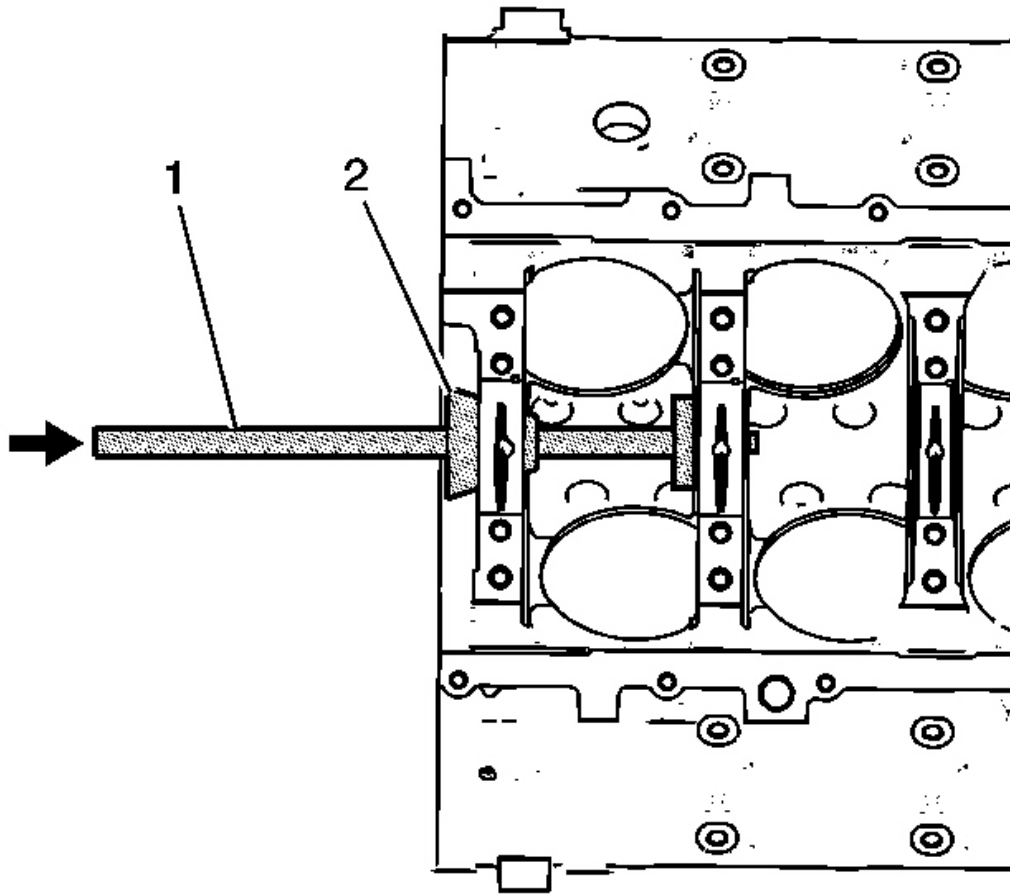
Driving Bearing Out Of Or Into Engine Block
